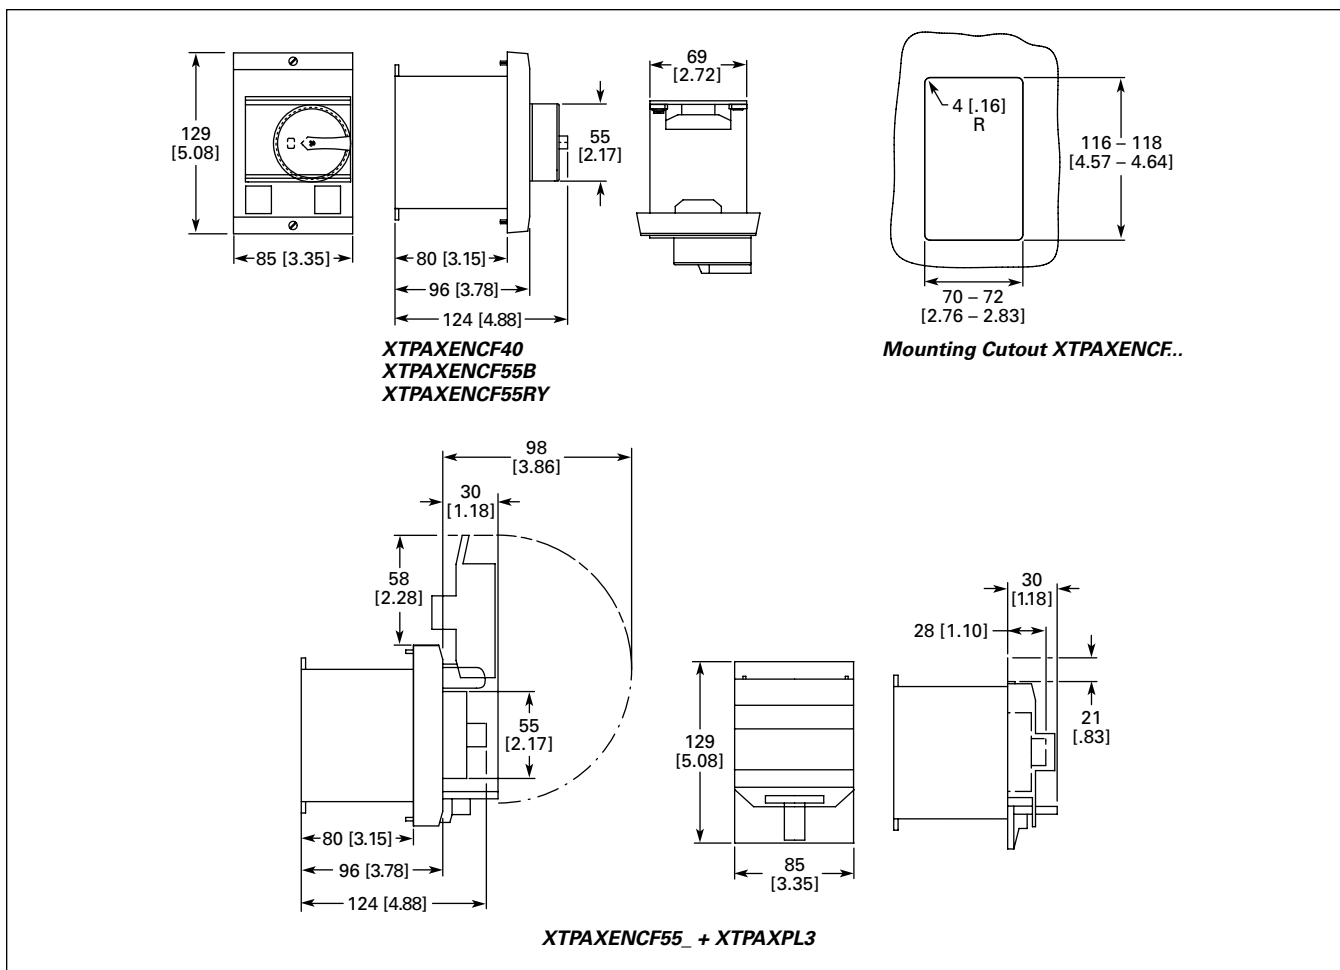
Insulated Enclosures for Flush Mounting of XTPR...B Manual Motor Protectors (Approximate Dimensions in mm [in])
